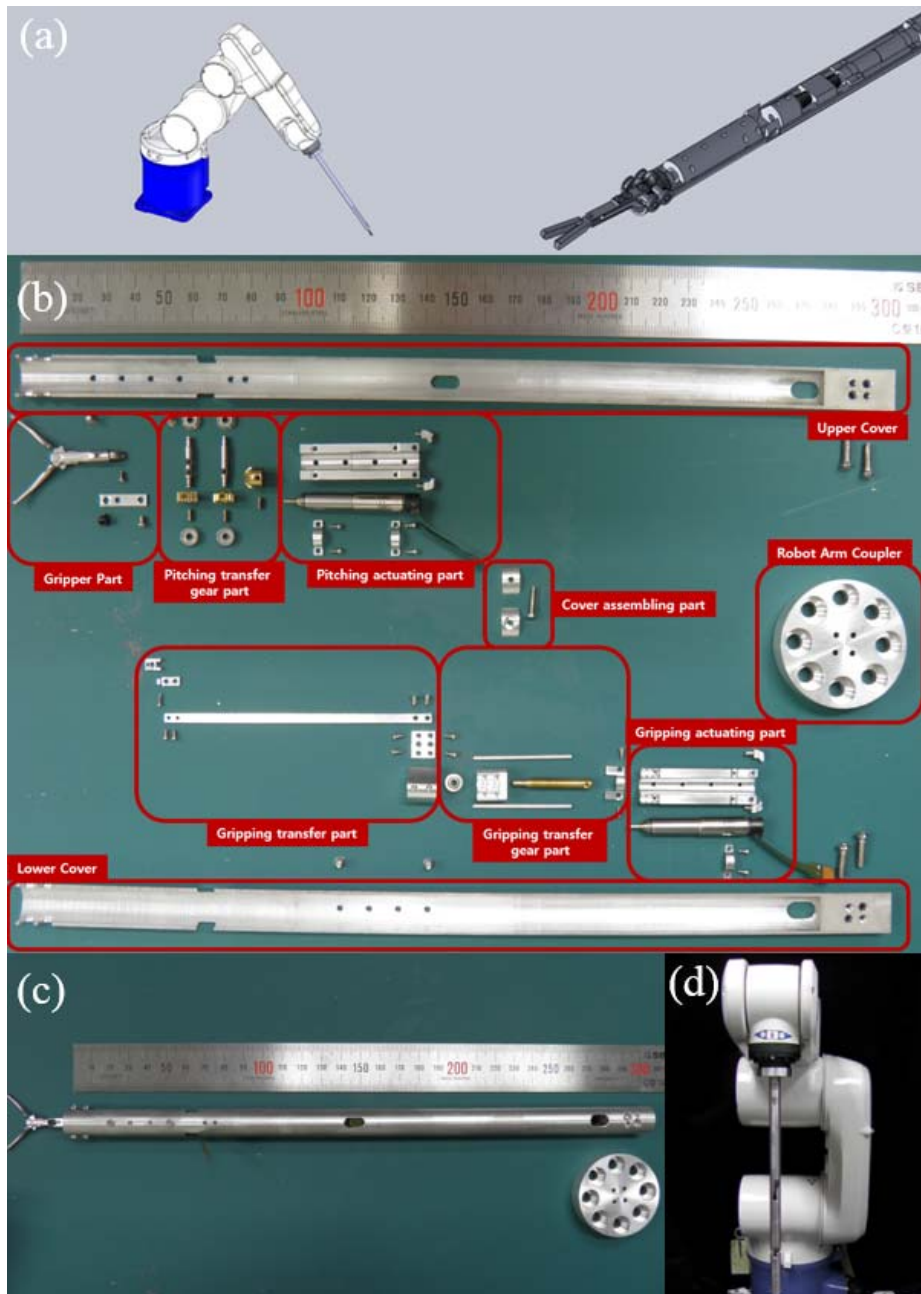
Prototype version 3, KS-3. (a) 3-D design of KS-3. (b) Several mechanical and electrical parts. (c) Assembled KS-3. (d) KS-3 was attached to external arm. The KS-3 was driven by 2 micro motors (motor's diameter: 6 mm) for gripping motion and pitching motion.
